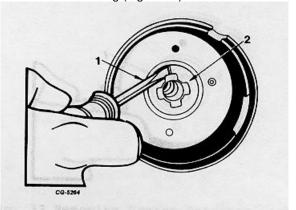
Removing Grease Retainer Washer (Distributors Without Tachometer Drive)
